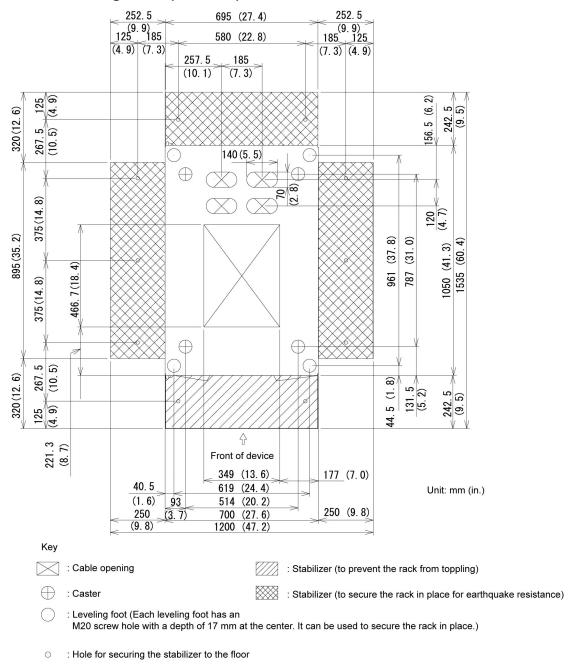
Bottom view drawing of the (standard) 19-inch rack
